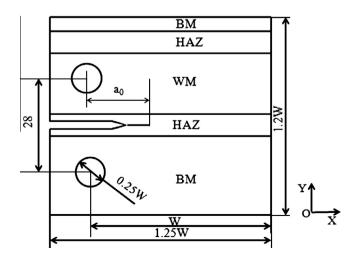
The geometry and dimensions of the CT specimen of welded joint [3].
